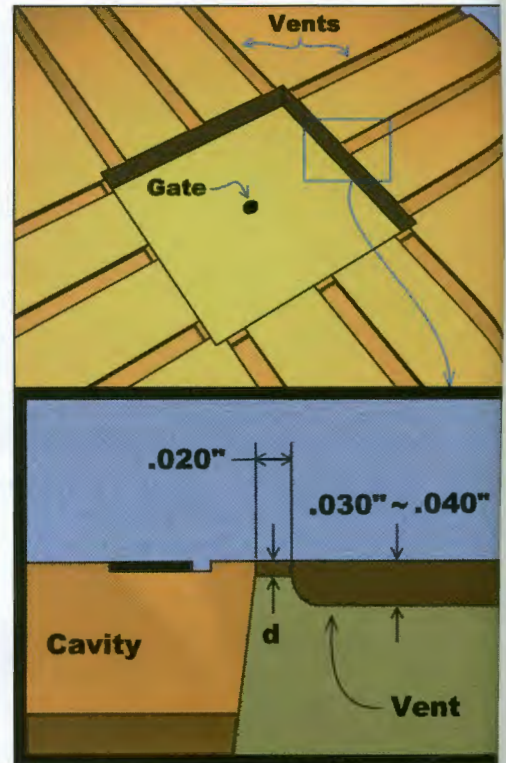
Illustration D: Venting of mold cavities, upper view showing vents bleeding to outside of mold. Lower view illustrates typical dimensions for vent and bleed off.
